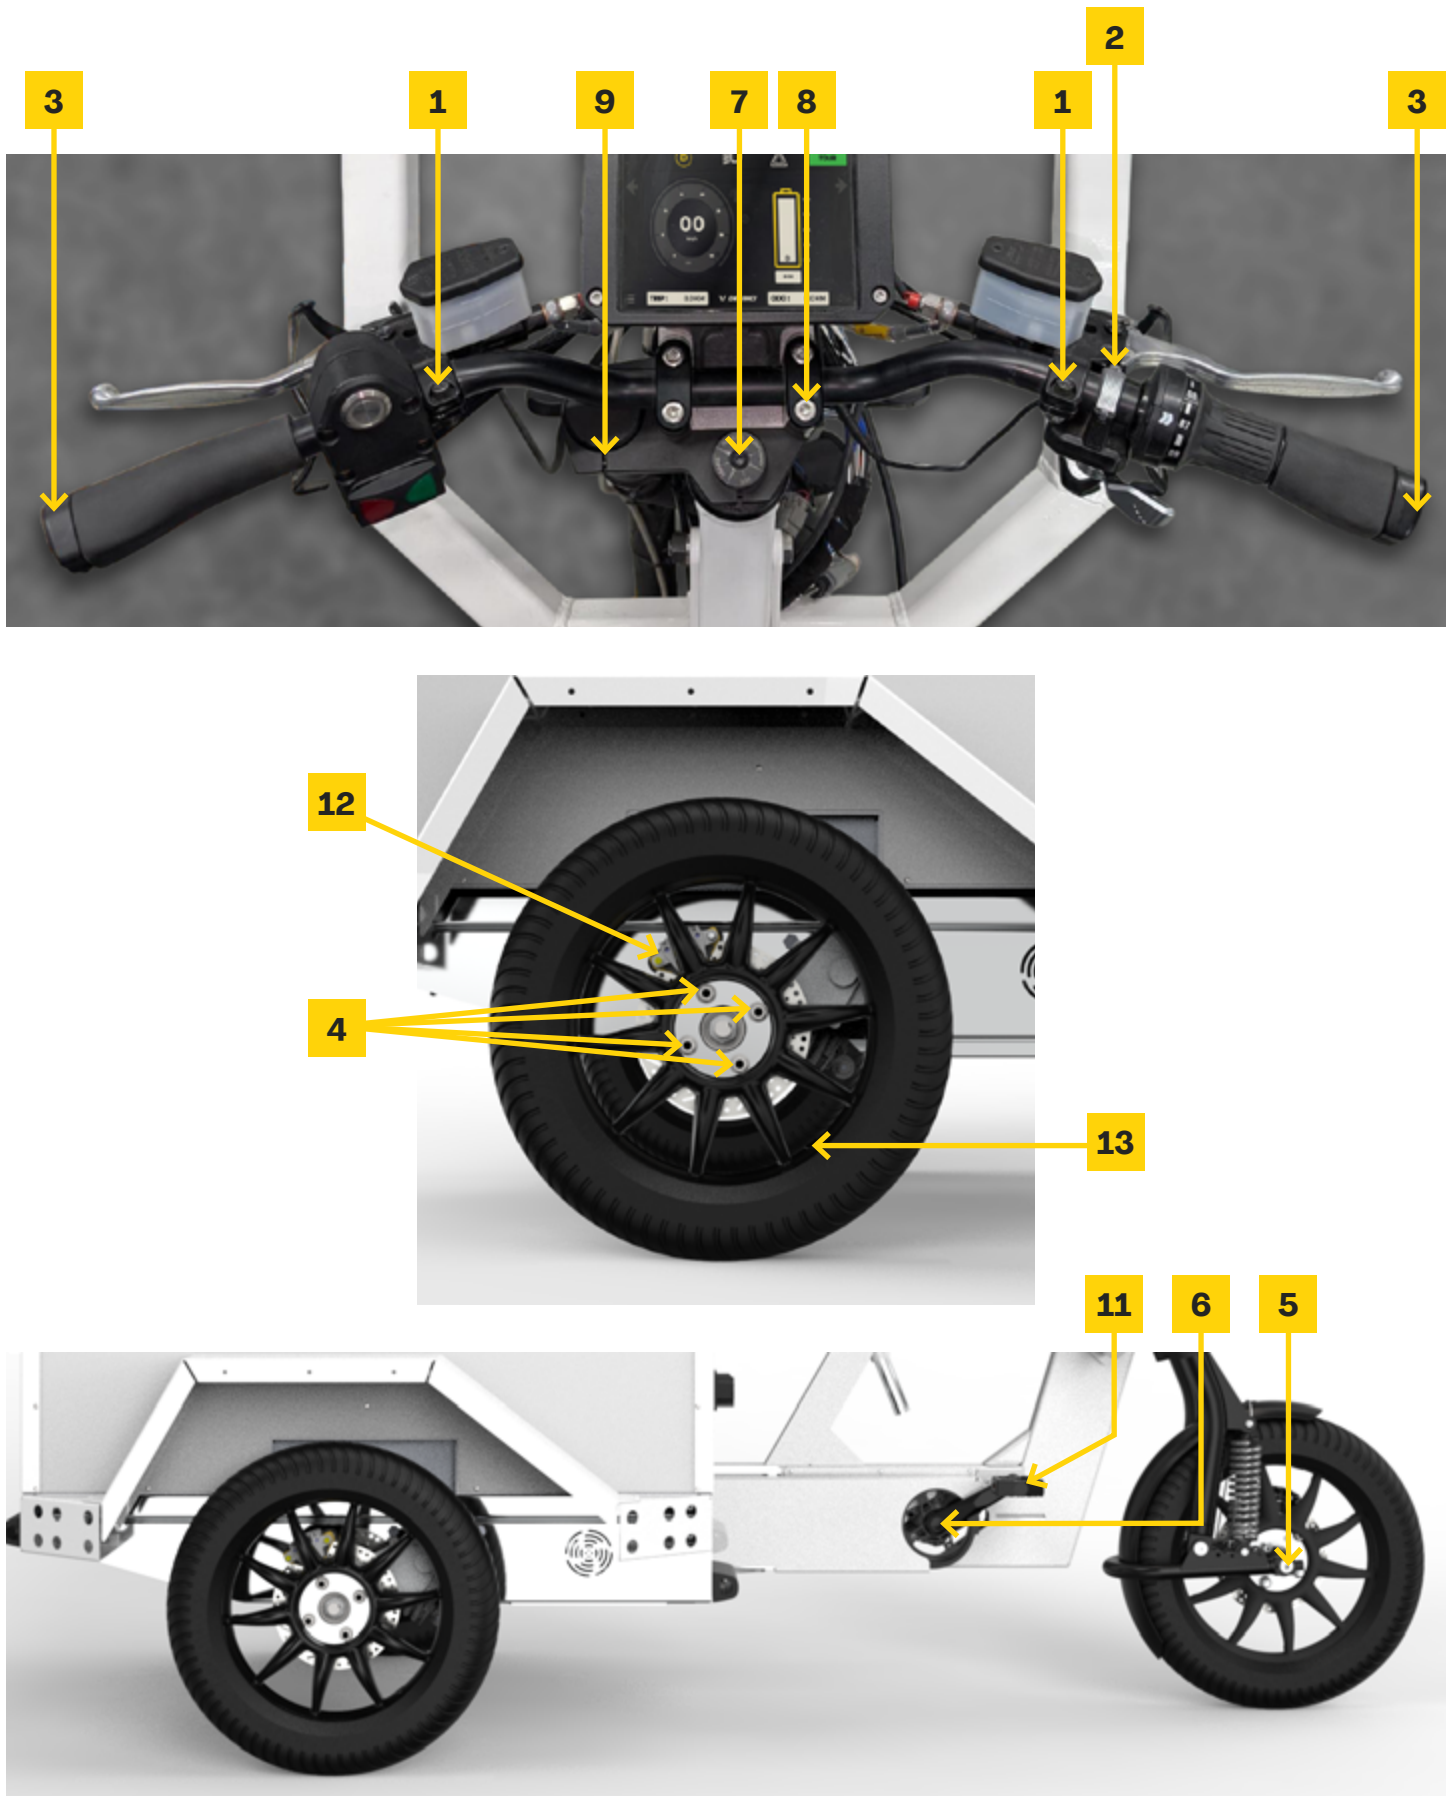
SCREW LOCATION FOR TORQUE PROVIDED
